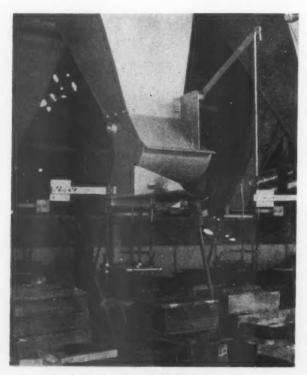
CLOSE-UP VIEW OF MOLDERS' SAND HOPPER
